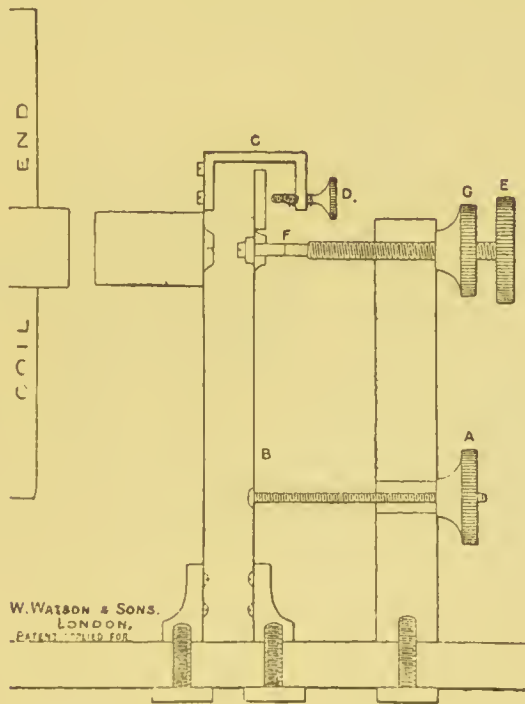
Vril contact breaker. A. Head of tension screw.
